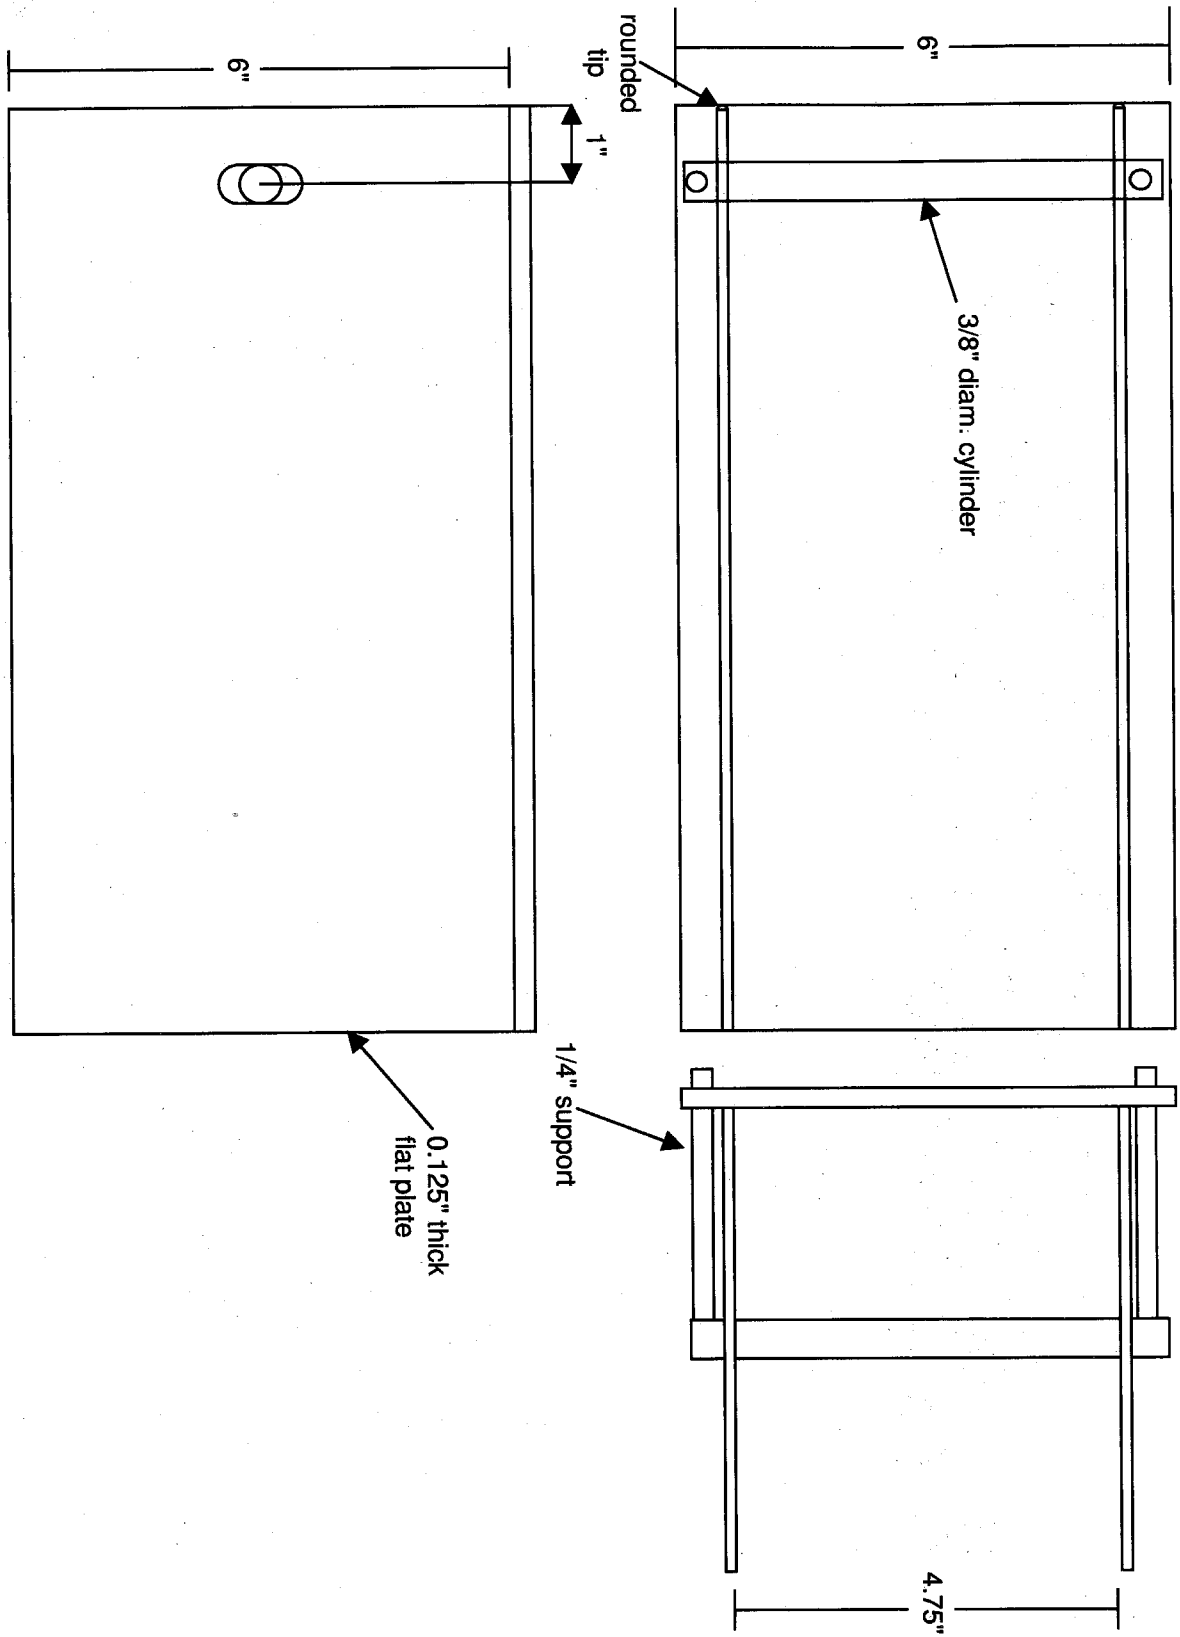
Schematic of the cylinder, flat plates, and supports.
